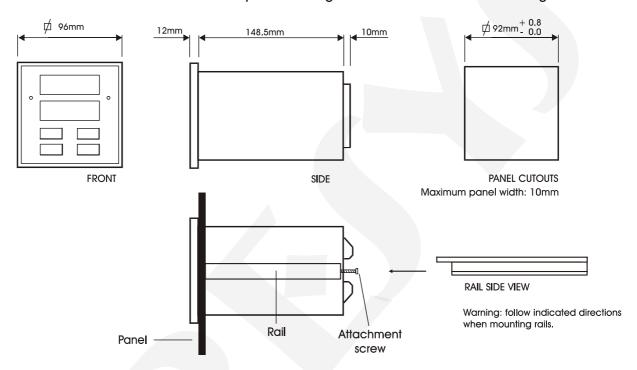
Dimensional drawing, panel mounting cutout and side view
